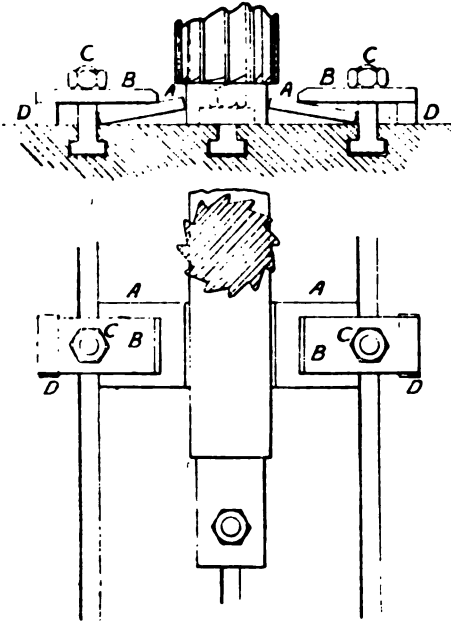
End Mill working on Piece held with Clamping Plates and End Stop.
